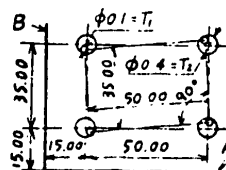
Tolerance Zone for Hole Axes of Fig. 3.
